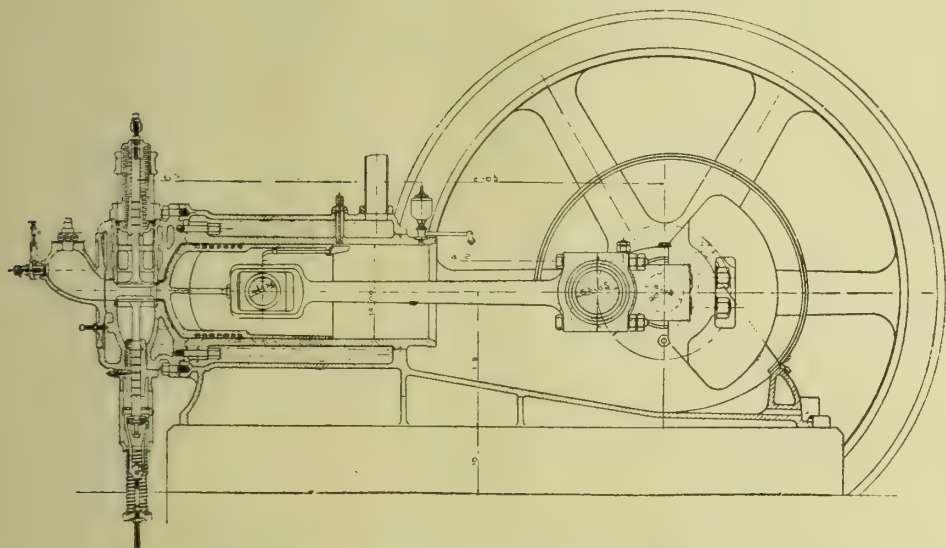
RUSTON-PROCTOR OIL ENGINE.
